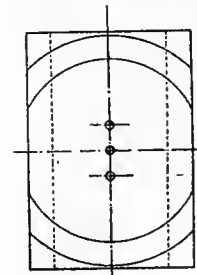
Sketch of turntable showing paper bearing strips on under side and alternate pivot holes.
